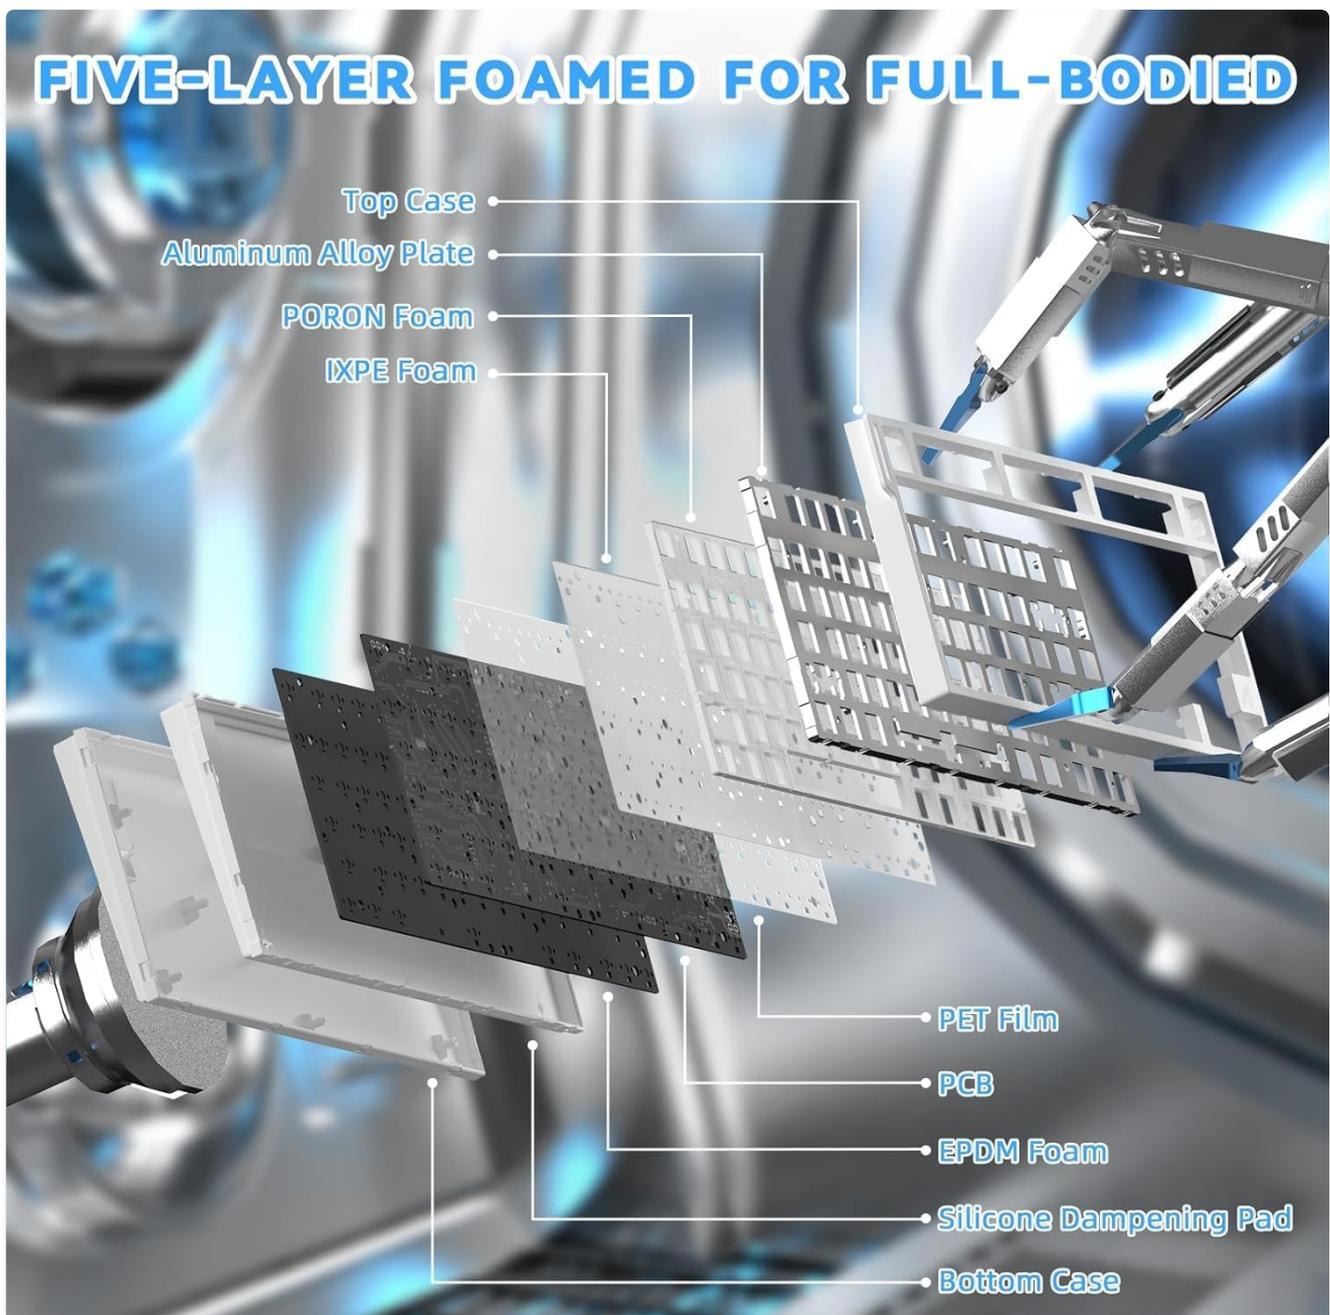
Exploded view illustrating the 5-layer sound-dampening system for enhanced acoustics.
